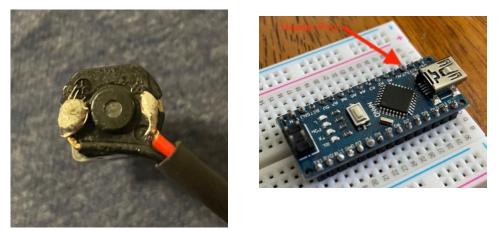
Soldered Motor Joints and Arduino Nano Header Pins
